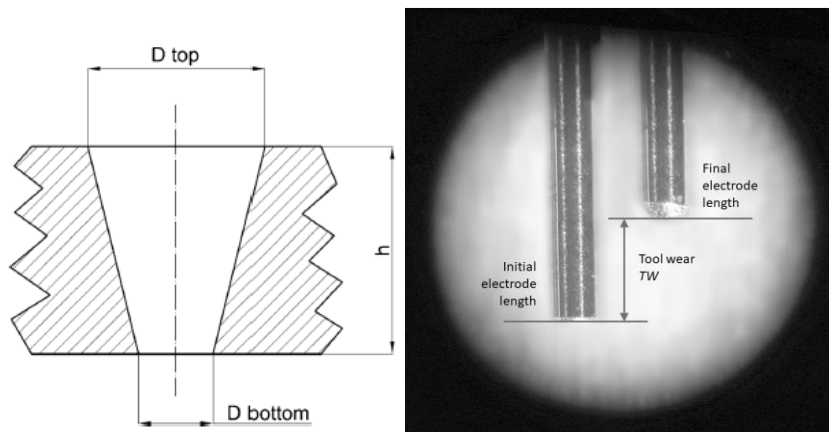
Hole geometry scheme (a) and electrode tool wear (TW) definition (b).
